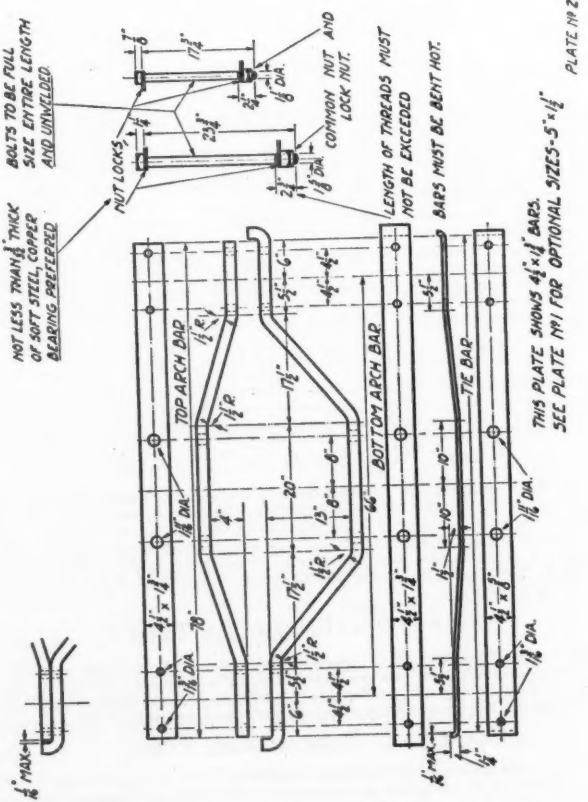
4 1/2 in. by 1 3/4 in. arch bars for 40-ton trucks
